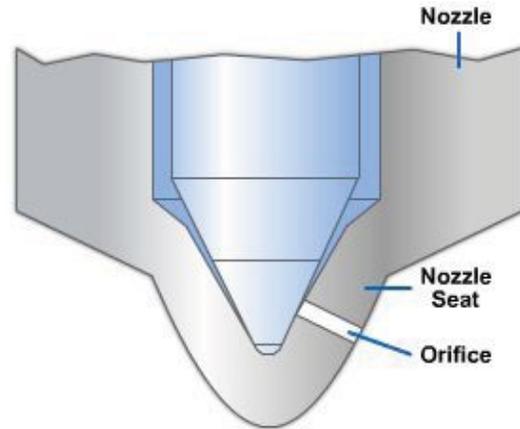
Sectional view of a valve closes orifice (VCO) nozzle.
